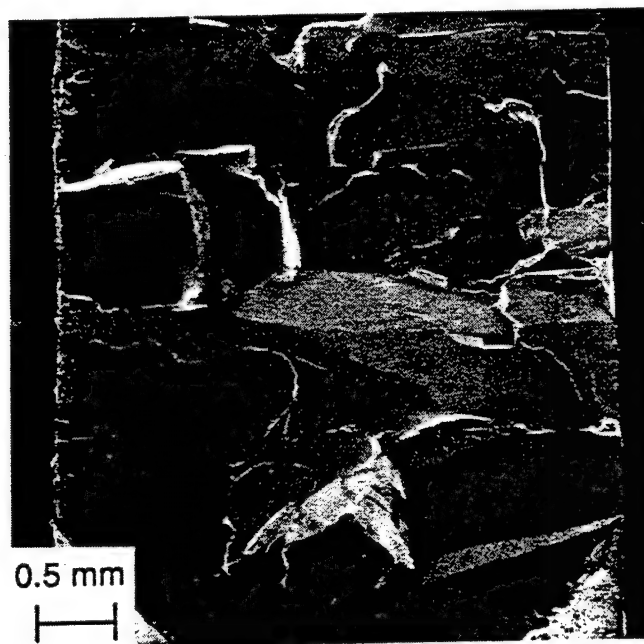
The fracture surface of the V-2.7 pct Si single-phase alloy (AM-2).
